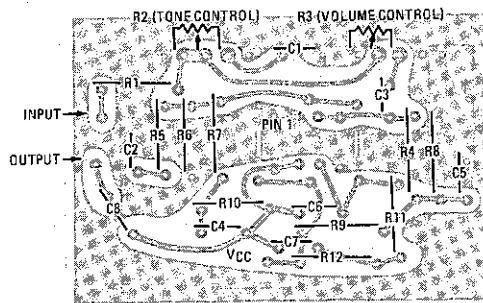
PRINTED CIRCUIT BOARD (Foil Side)
